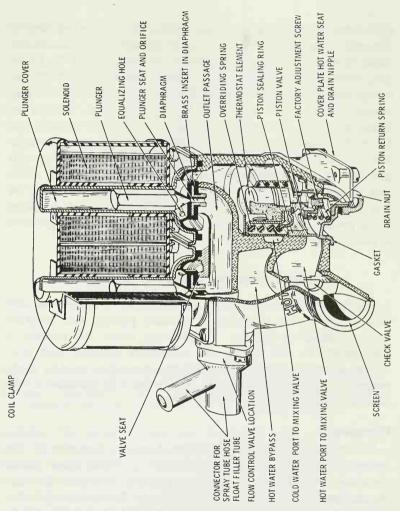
The cross-sectional view of the inlet and mixing-valve assembly for an automatic washing machine.
